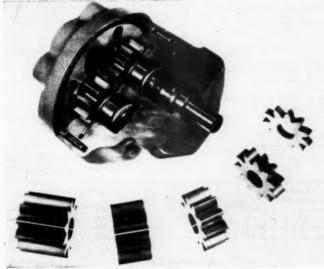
High-Pressure Hydraulic Pump Gears from Alloy Steel Powder Produced by Keystone Carbon Co, and Pump Assembly.
